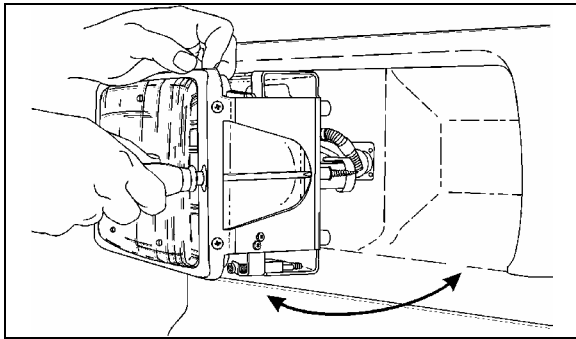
HEADLIGHT ASSEMBLY 06405
